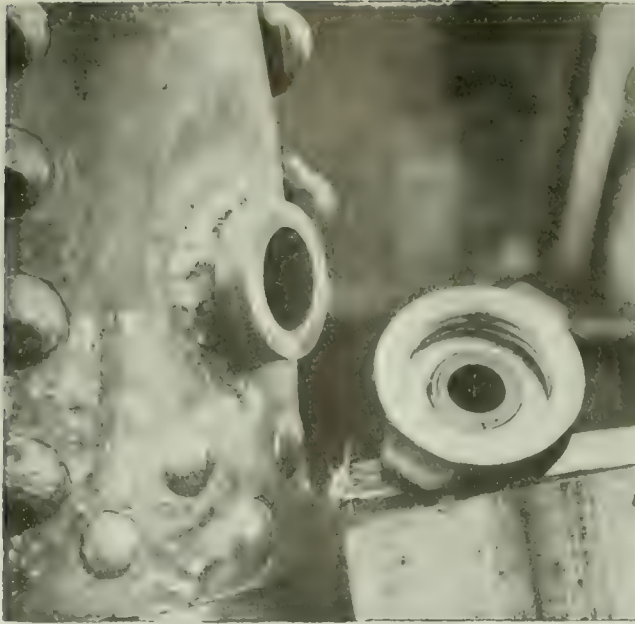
IMPROVED WASHOUT PLUG FOR LOCOMOTIVE BOILERS. IT IS WELDED INTO POSITION.
